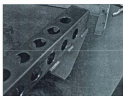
Welding at the base. This plate increases the bending strength of the inner pod strut.
